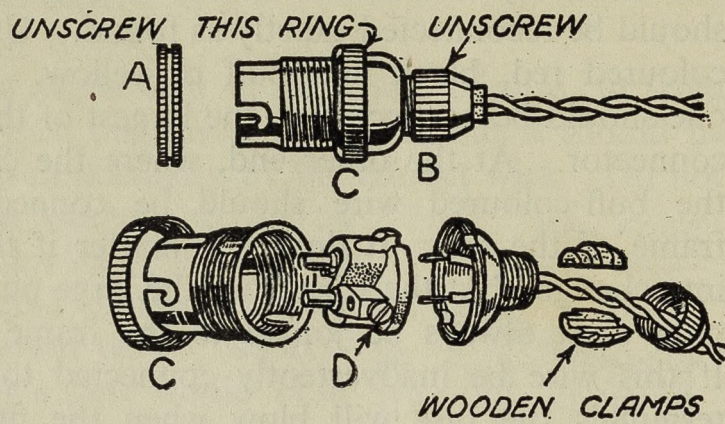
The various parts of a lamp holder showing how the "flex" is fitted.
